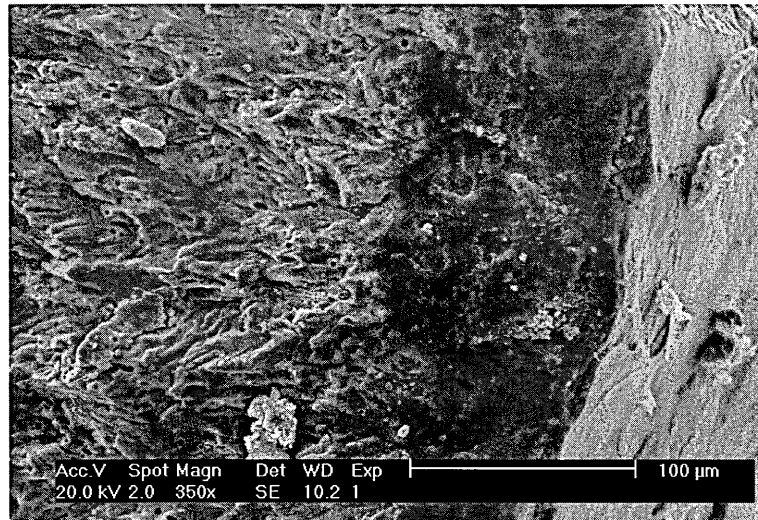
SEM Image of Specimen#9 Fracture Surface
